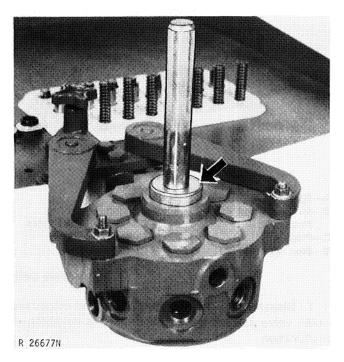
Installing Seal Using OTC-814 Driver and JDH-18
